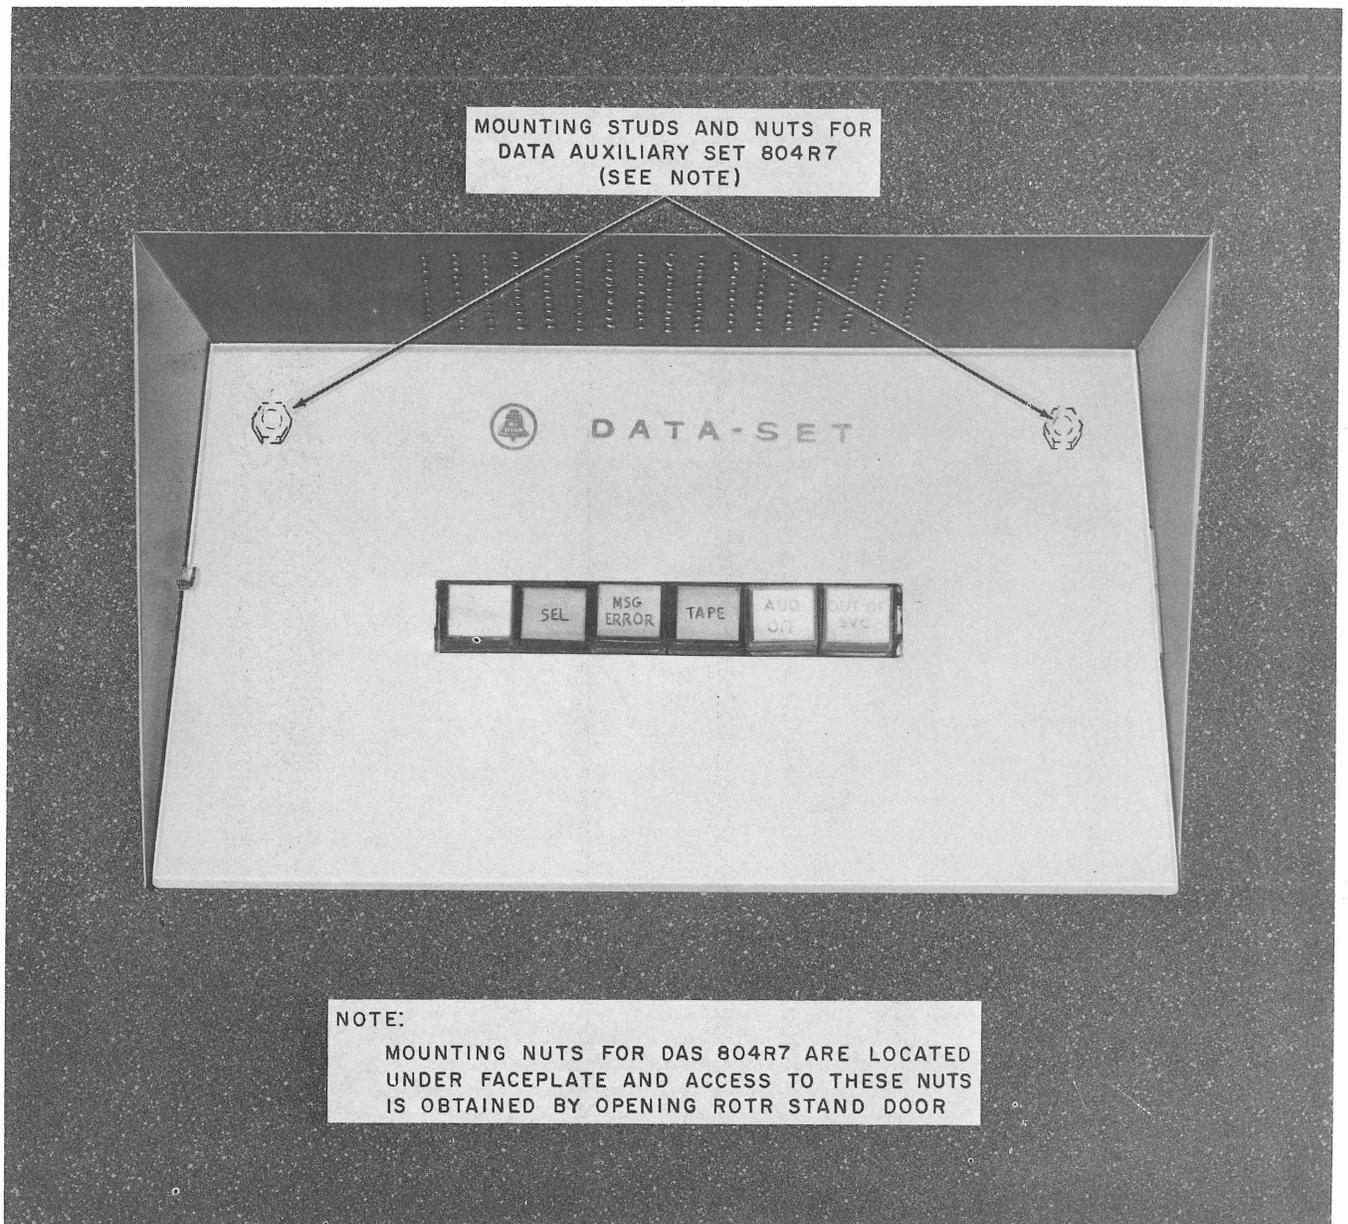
DAS 804R7 Mounted in the Door of the Primary 35 ROTR TTY
